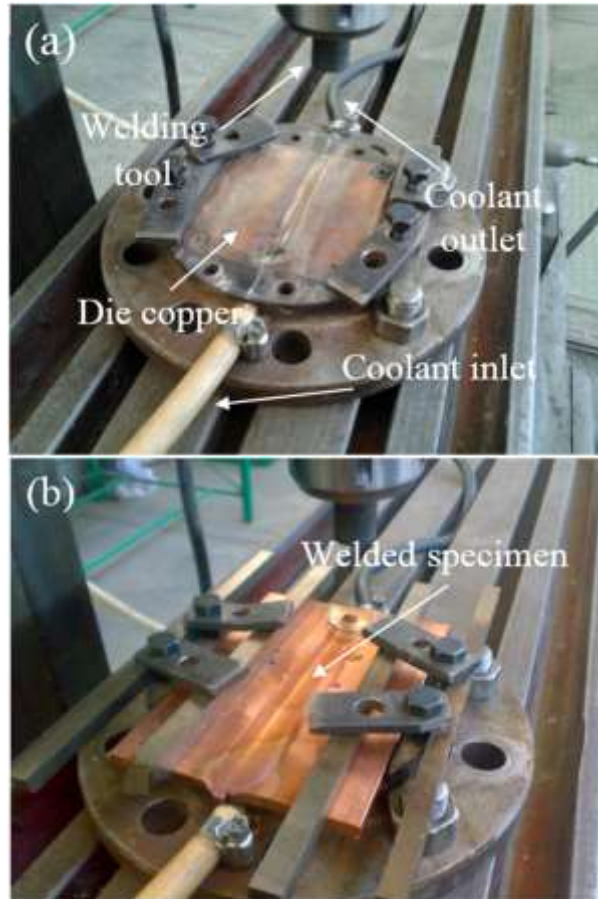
View of (a) the tools and the die used in the welding process and (b) the pieces fixed to the die after the welding process.
